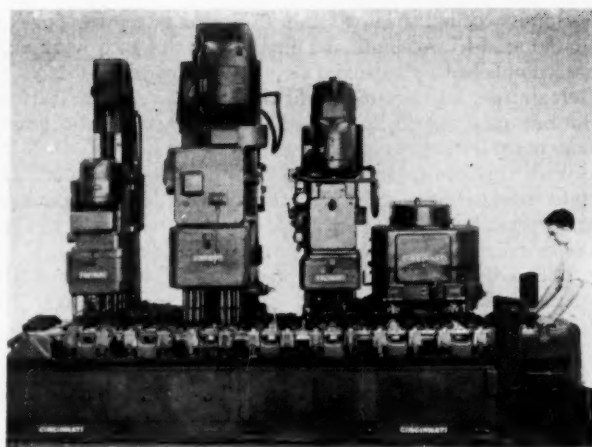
TRANSFER-TYPE MACHINE TO MILL, DRILL, COUNTERBORE, AND TAP V-8 CYLINDER HEADS
